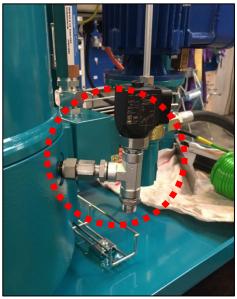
Example of inserting a T- connection on the pressure gauge position to mount the hydraulic hose for the CMU outlet
